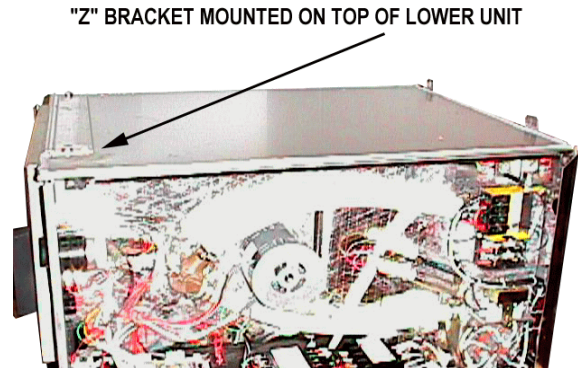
If you purchased only the mounting kit, you must install a “Z” bracket on the bottom rear of the existing upper unit.
